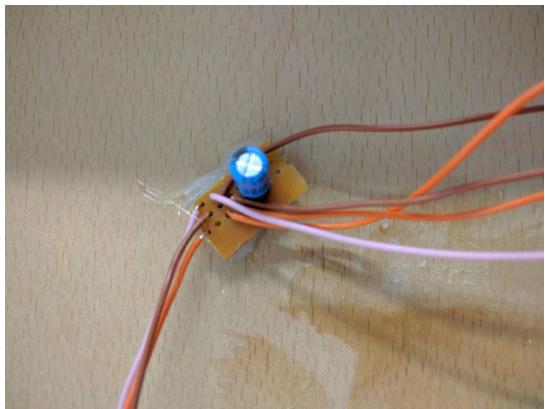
, 98, 99 , 100. Circuit soldering using strip boards.
